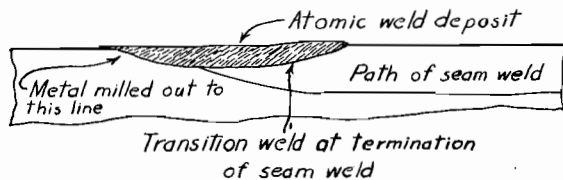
is a transition weld at the termination of an electric seam weld.
